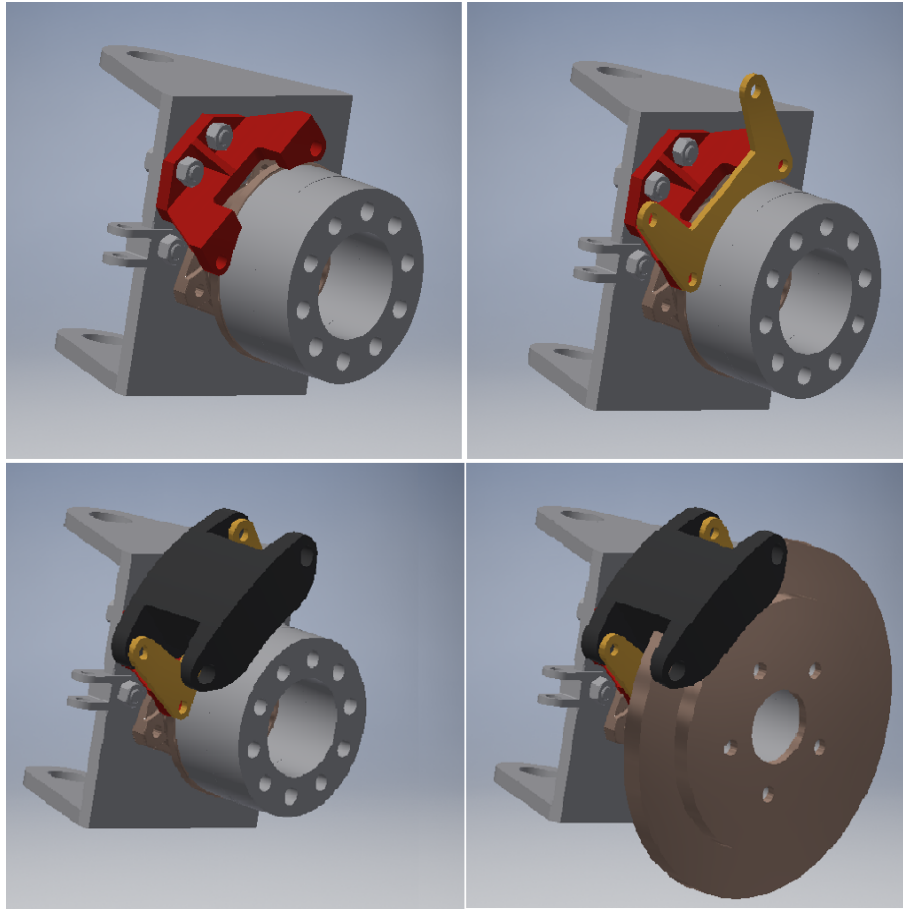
Assembly of Initial design of caliper bracket – two part design.
